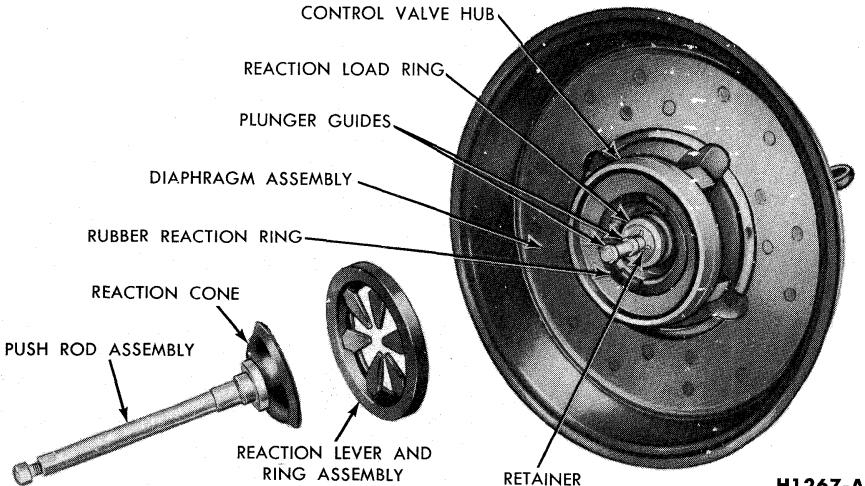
Disassembly or Assembly—Reaction Components and Push Rod-to-Valve Hub
